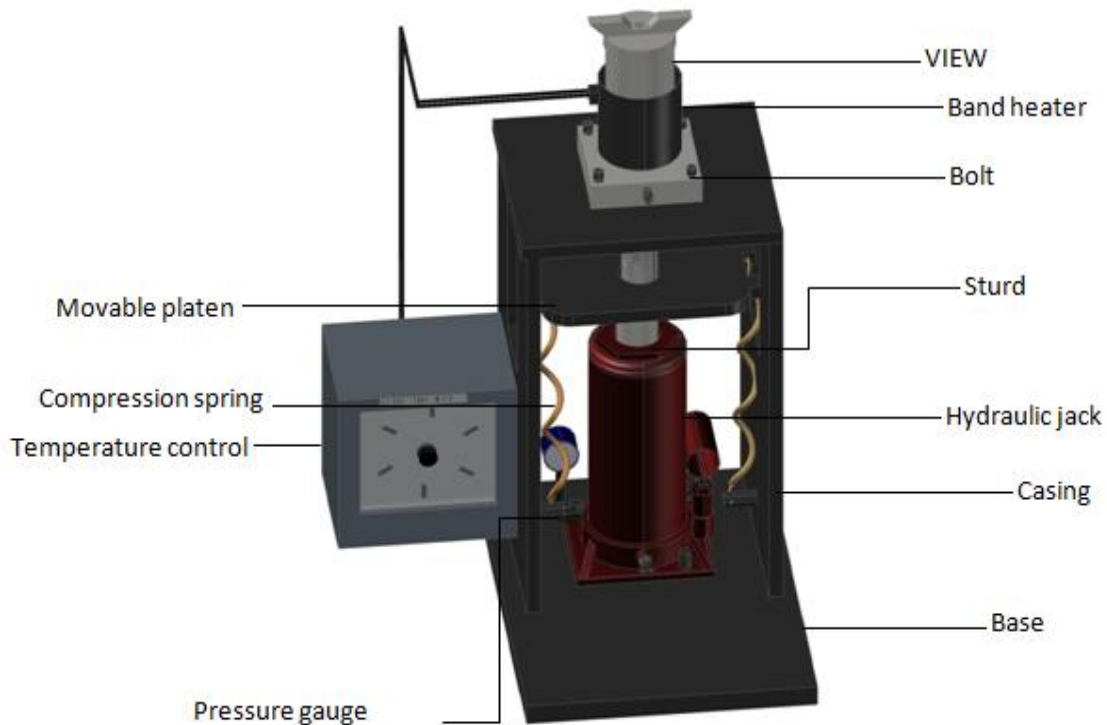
Final 3D Design of Compression Hot Mounting Press Machine
